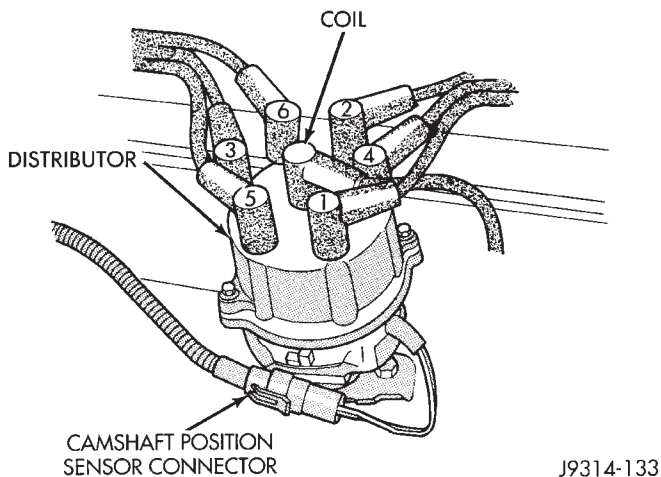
Distributor and Wiring—4.0L Engine—Typical
